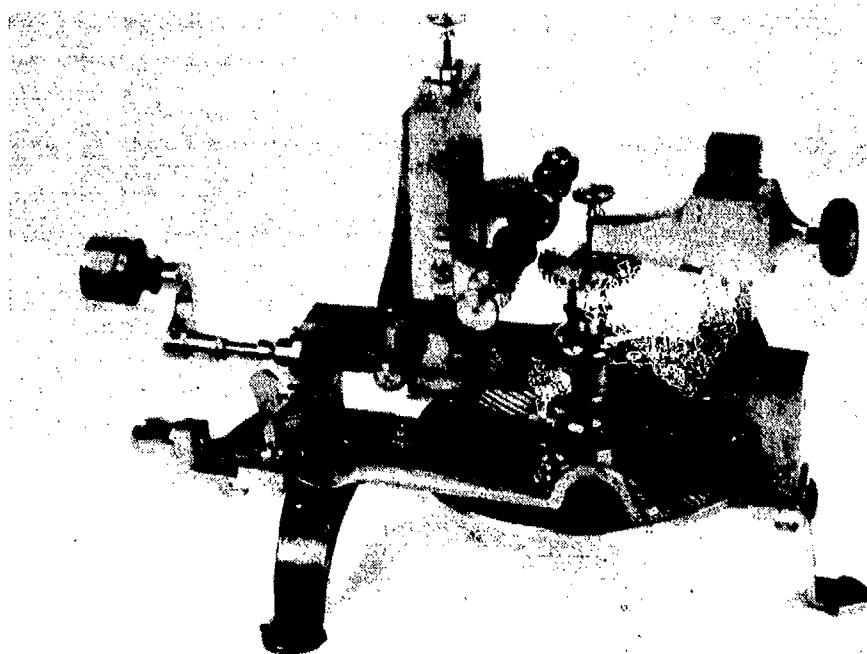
Early hand-powered production machine for making clockwork gears by Christopher Polhem of Sweden (ca. 1729). Index plate for spacing teeth. (Courtesy of The Smithsonian Institution.)
